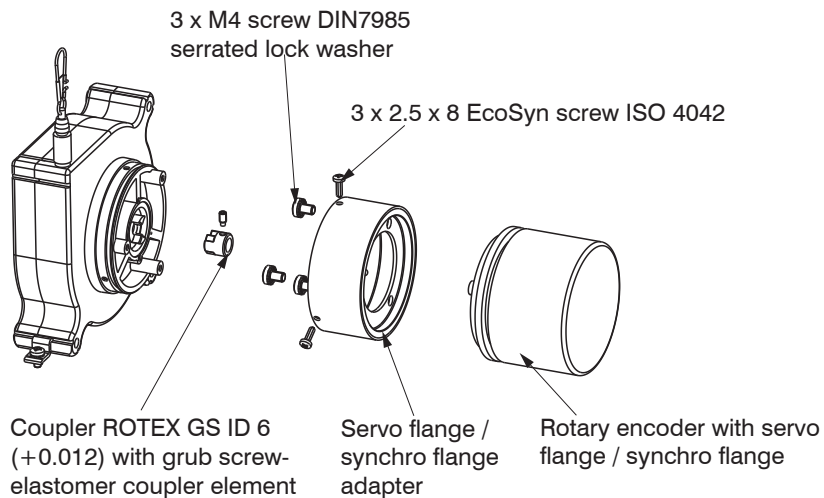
Mounting of adapter flange and encoder, WPS-2400-MK60-M
